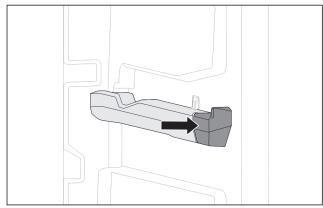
Attachment on the right molded rib ► Press attachment onto molded rib.
